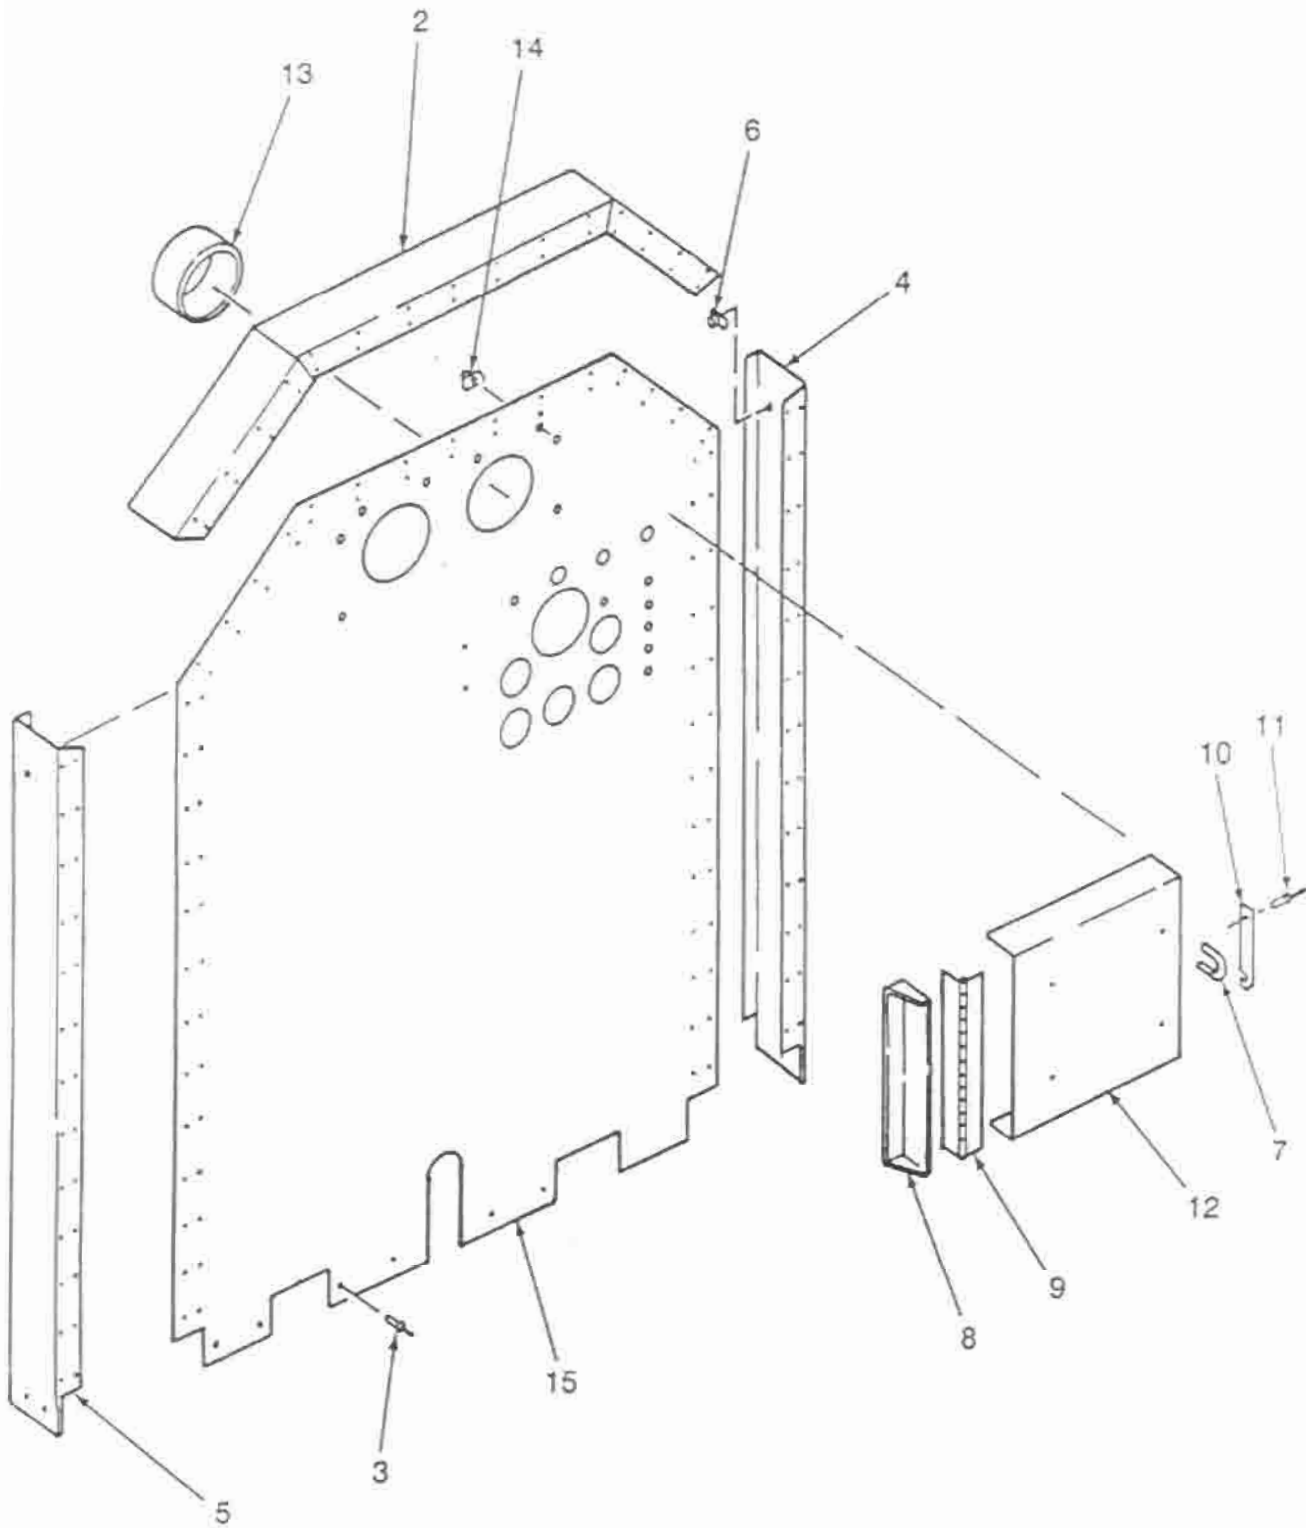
Panel Assembly Rear (Sheet 1 of 4)
